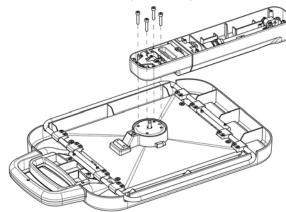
Remove Tray Assembly from Latch Release Mechanism
